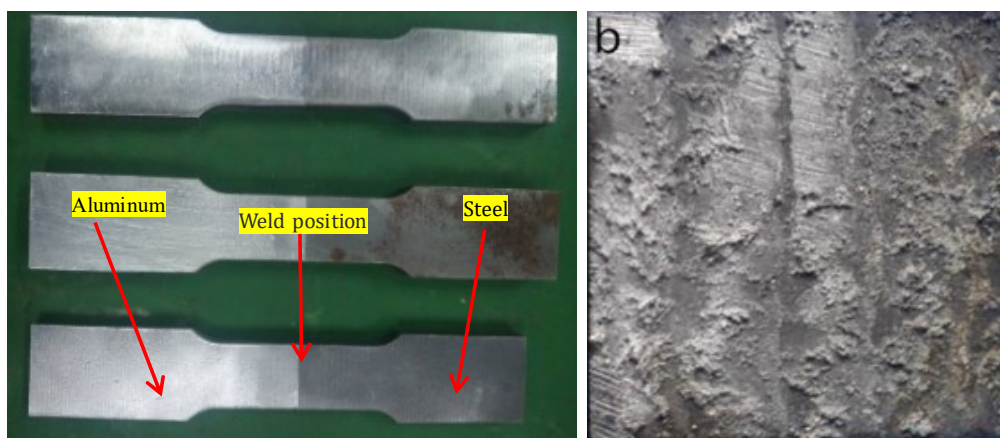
Left: Tensile specimen. Right: The macroscopic morphology of the tensile specimen's fracture surface.
